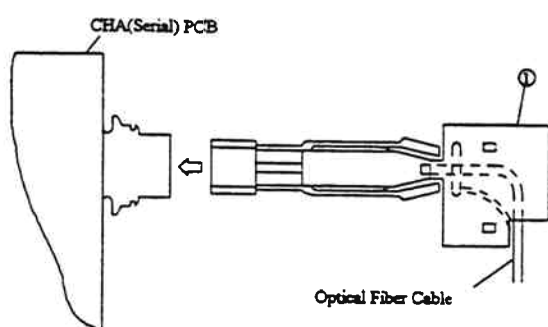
Connection of Optical Fiber Cable
